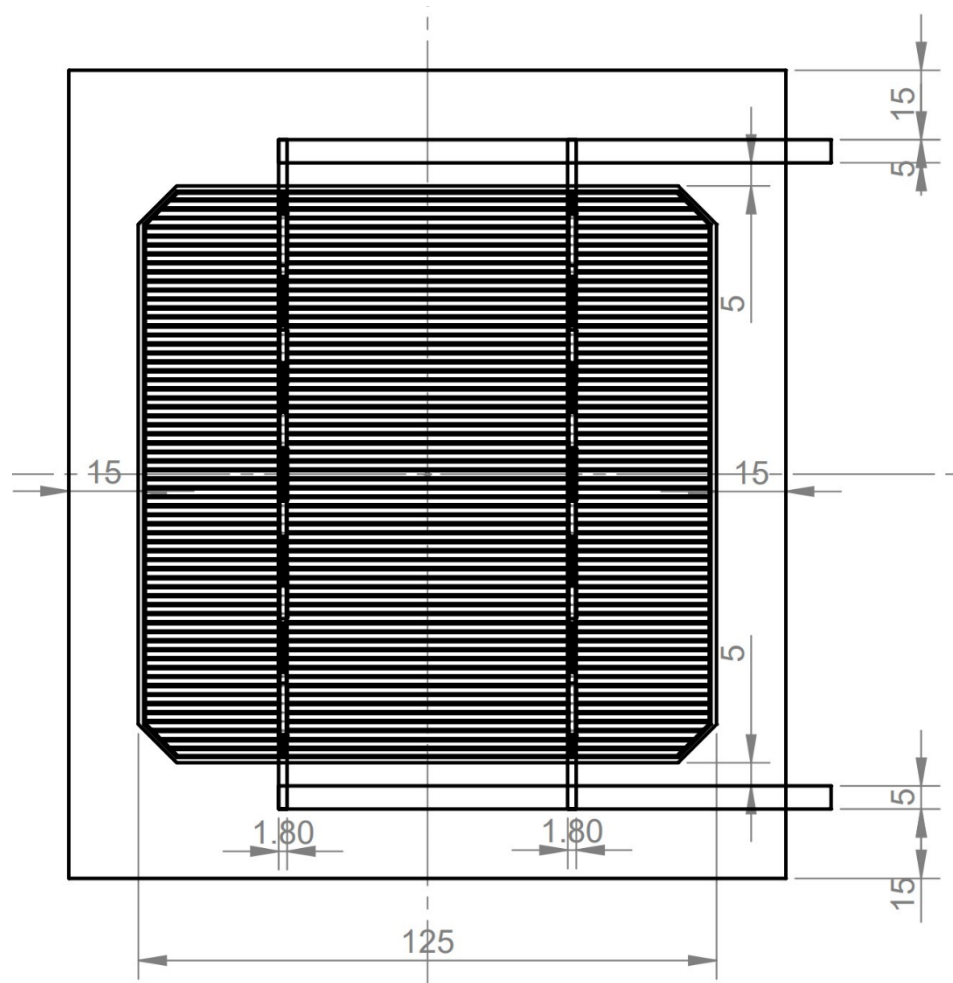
Prototype cell interconnect 2D CAD drawing with minimum insulation requirements dimensioned
